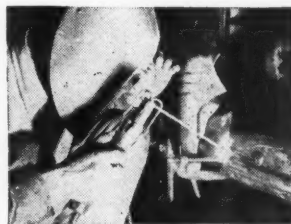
Repairs Bumper. Butt welds parts in place with Lincoln "Shield-Arc* LH-70" electrode. Saves cost of new bumper.
